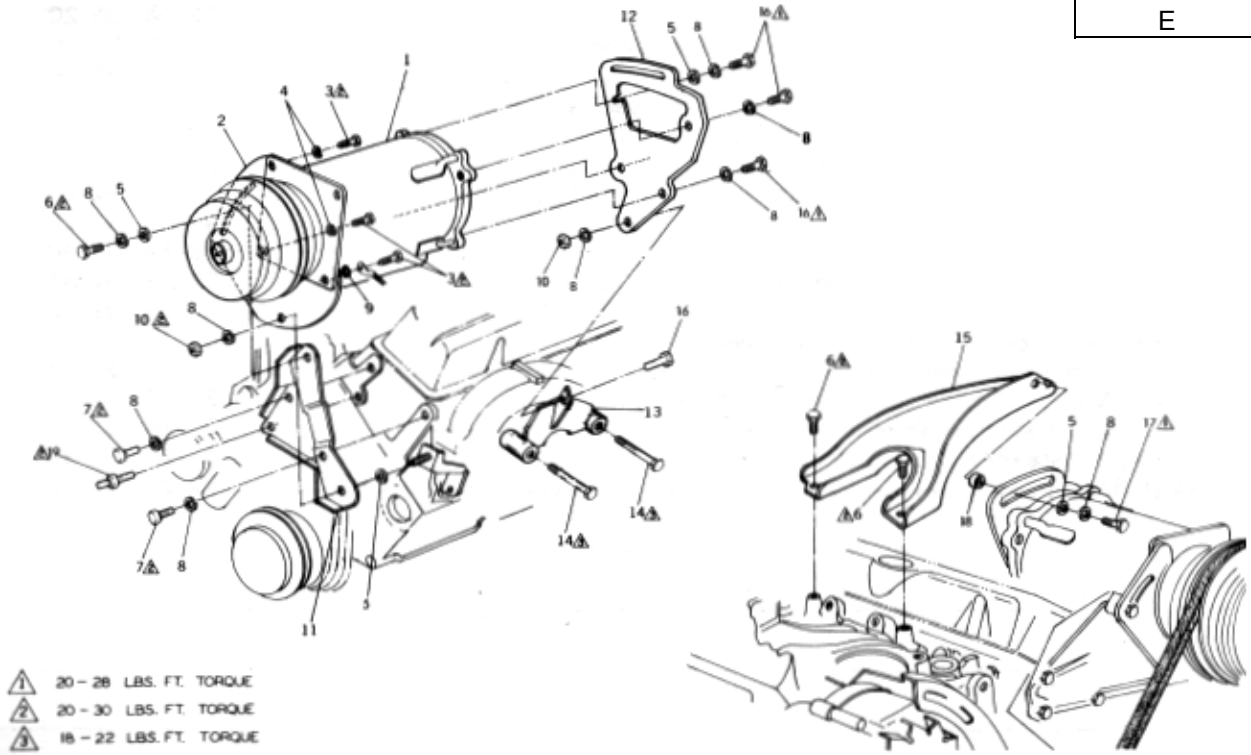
Air Conditioning Compressor and Mounting, 8 Cylinder Engine
